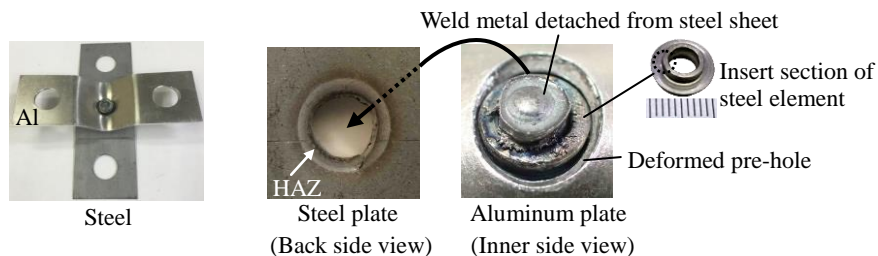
Typical fracture appearance of EASW joint in cross-tensile test
